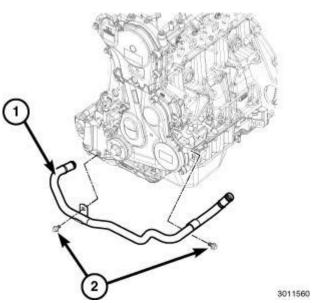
Coolant Tube & Bolts Courtesy of CHRYSLER LLC
